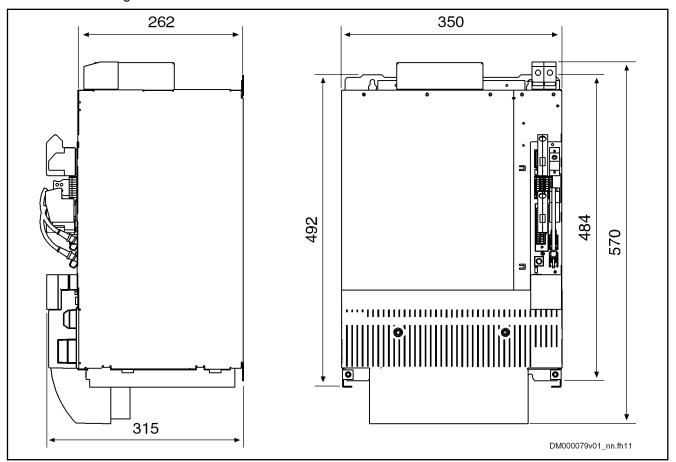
Dimensional drawing HCS03.1E-W0210
